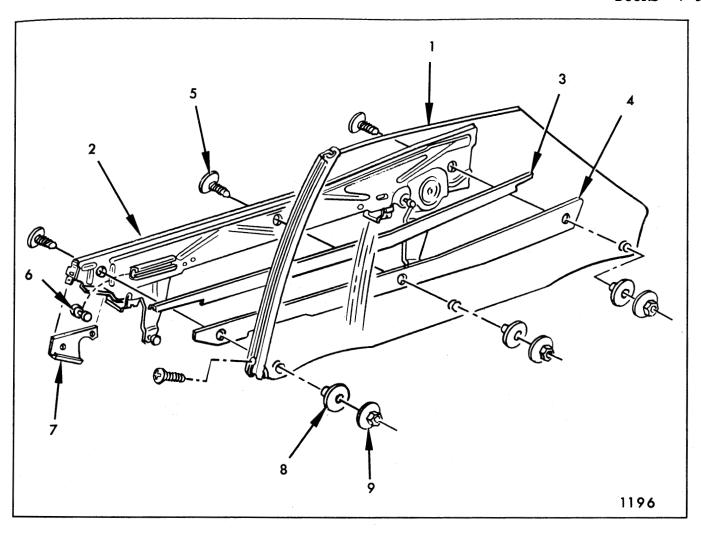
Rear Door Window Assembly - "B & C-39" Styles Shown - "A" Similar
